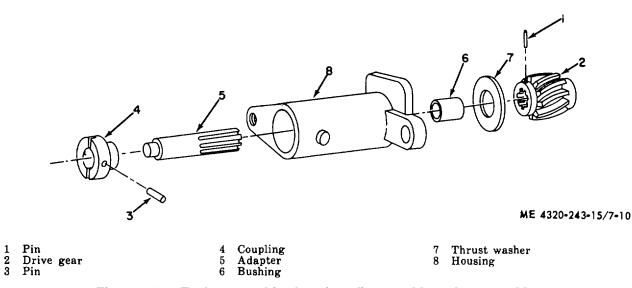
Tachometer drive housing, disassembly and reassembly.
